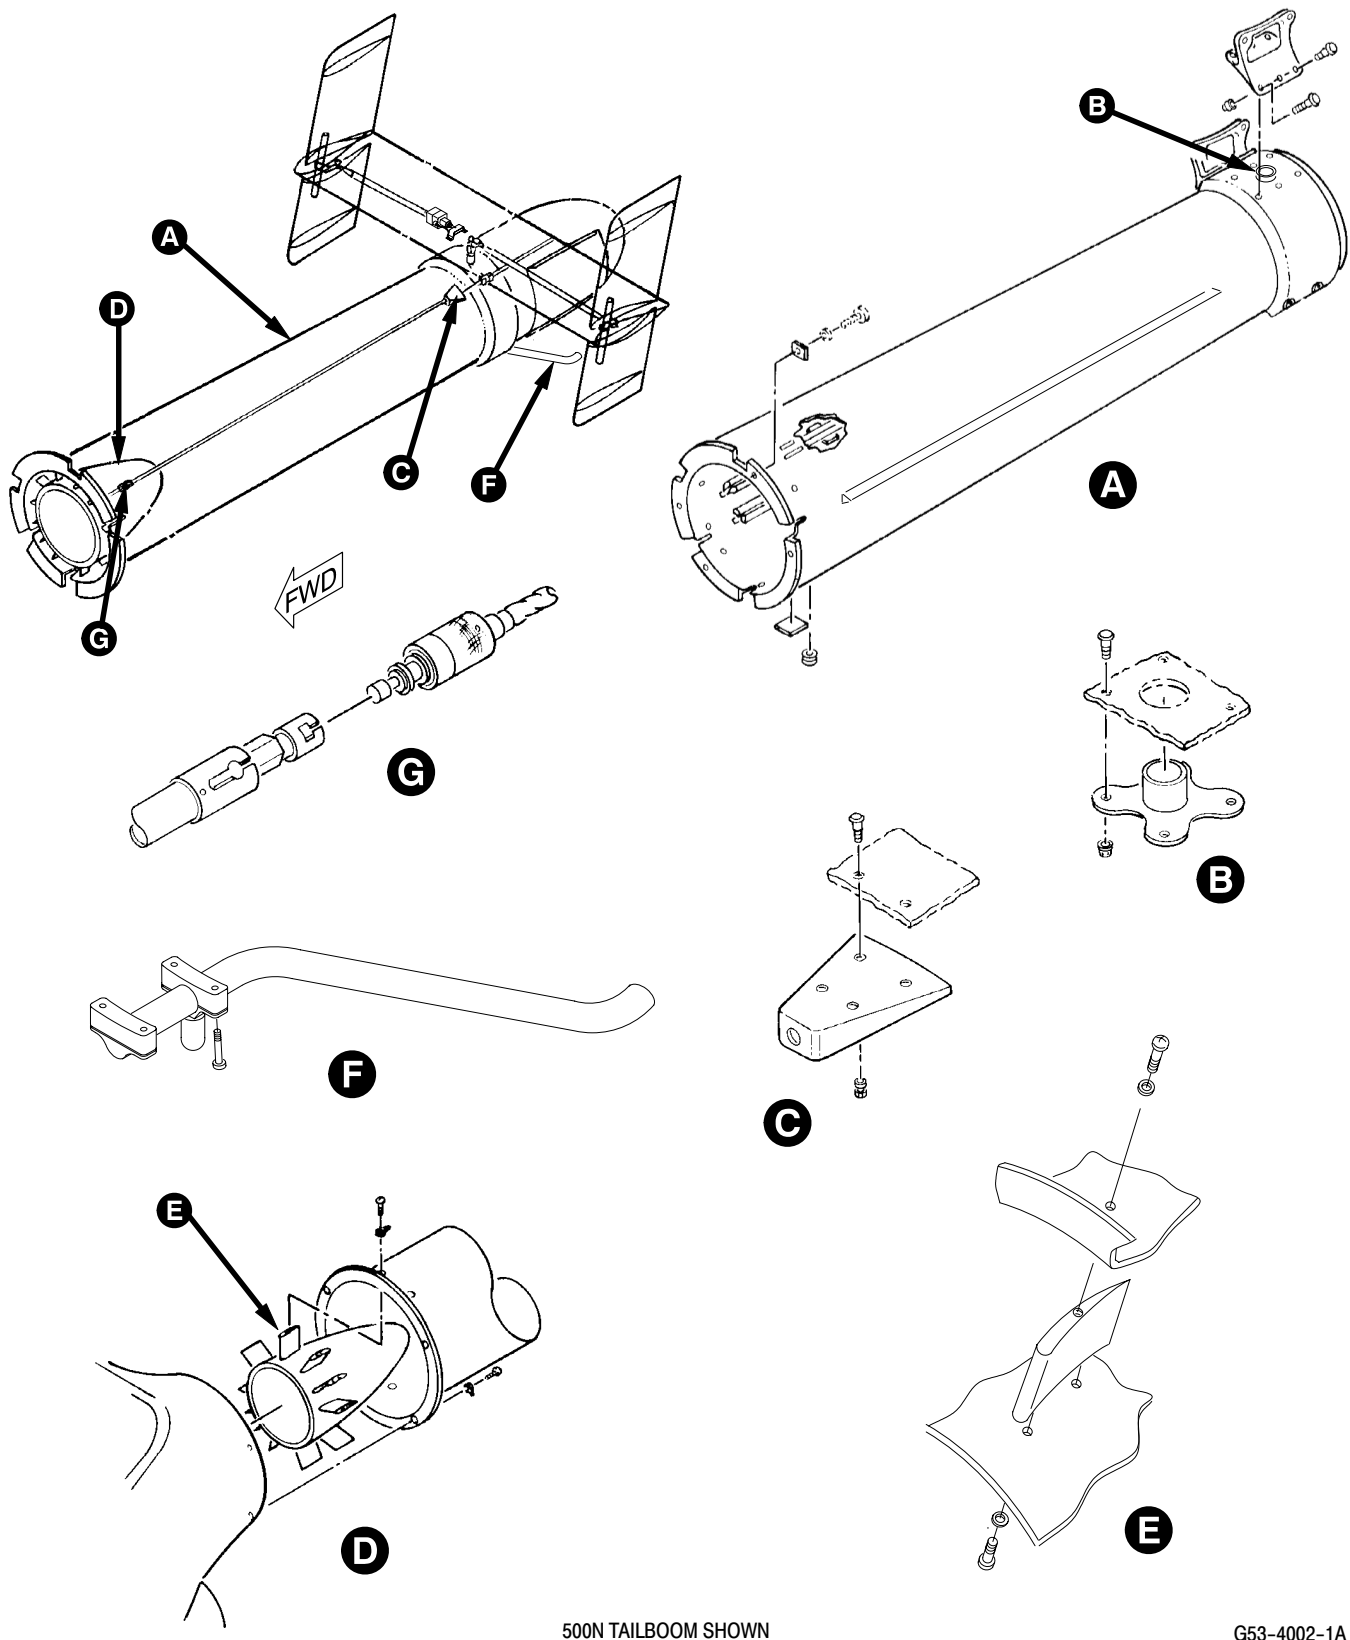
Tailboom Assembly (Sheet 1 of 3)
